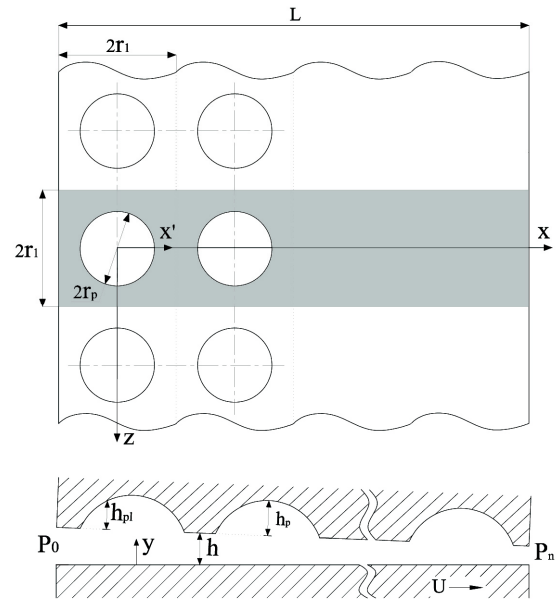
Schematic of micro-dimpled sliding bearing machine components
